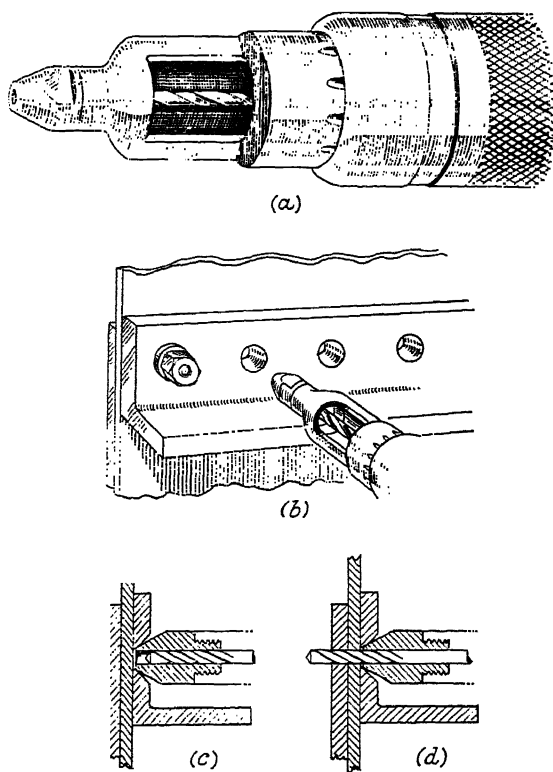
DRILLING HOLES FOR A RIVETED JOINT CONSISTING OF TWO SHEET-EDGES AND AN EXTRUDED ANGLE BAR
